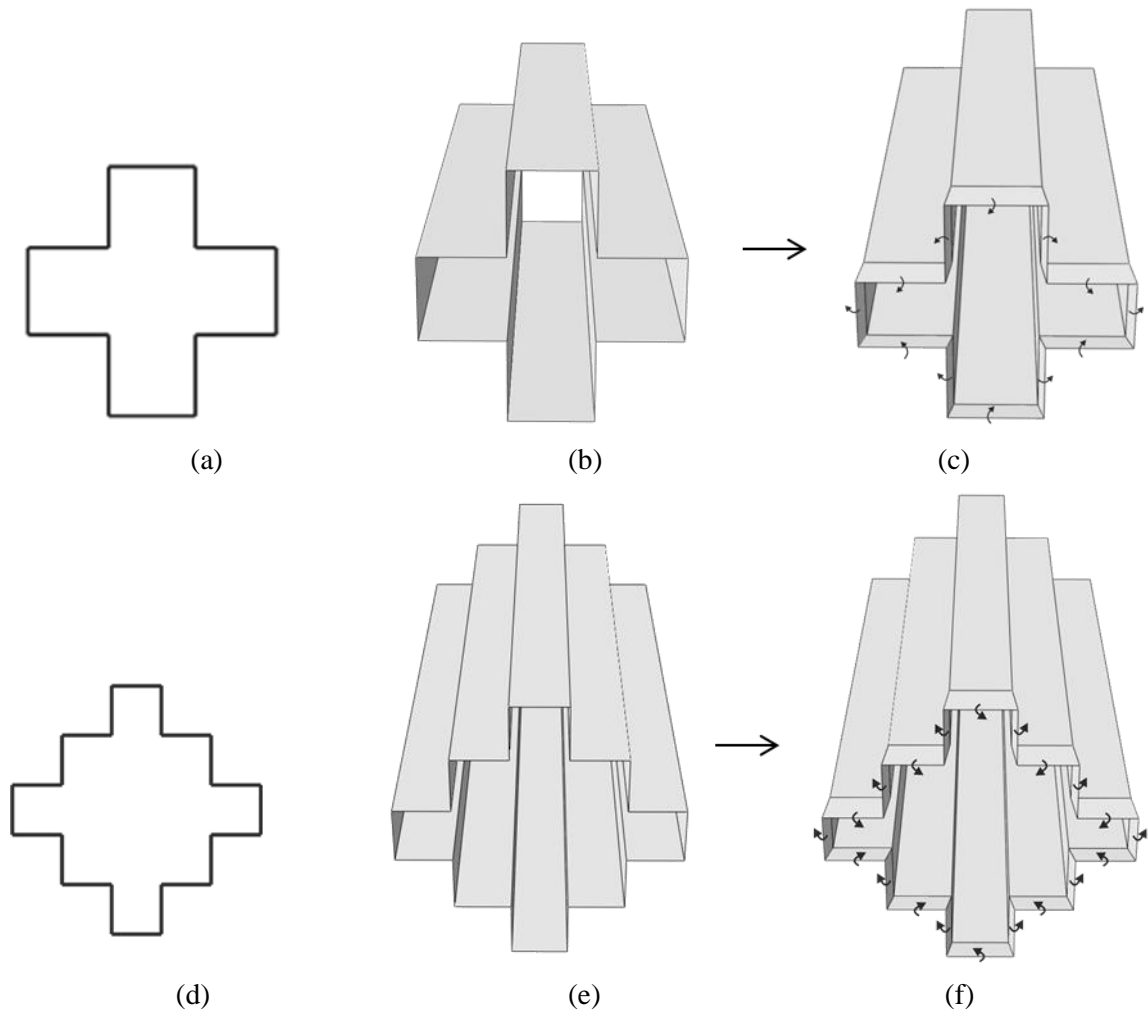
Method of generating origami concave tubes: (a) cross-section of one concave shape; (b) tube made out of cross-section in (a); (c) origami initiator added into tube in (b); (d) cross-section of another concave shape; (e) tube made out of cross-section in (d); and (f) origami initiator added into tube in (e).
